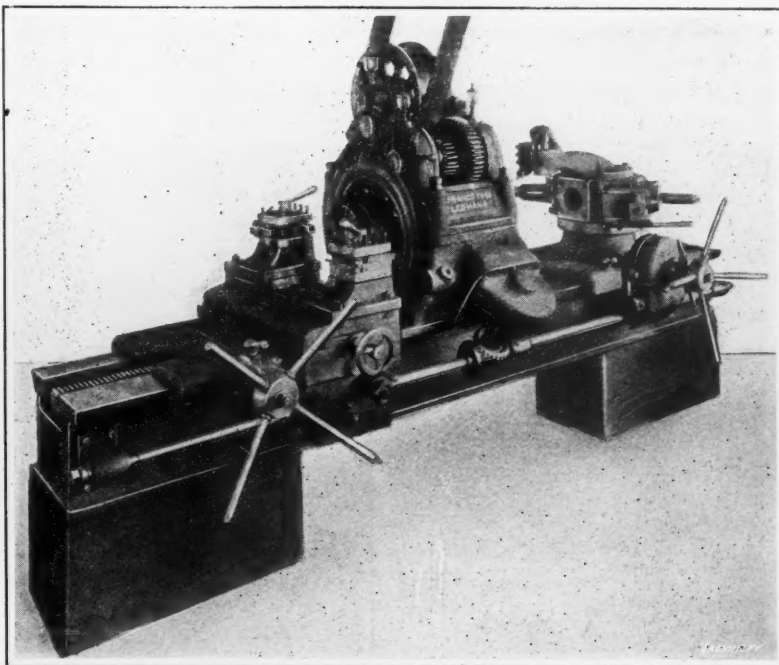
Franco Tosi Shell Lathe, showing Turret carrying Tools for working on Base of Shell
